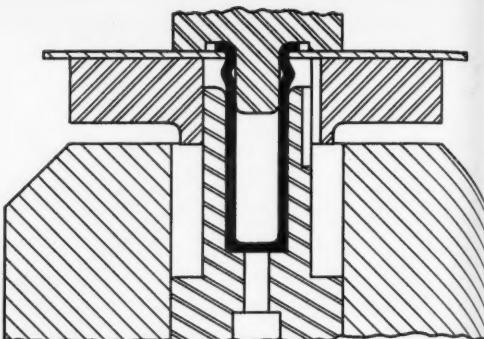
As Punch Continues to Descend, the Tube Bulges Outward
